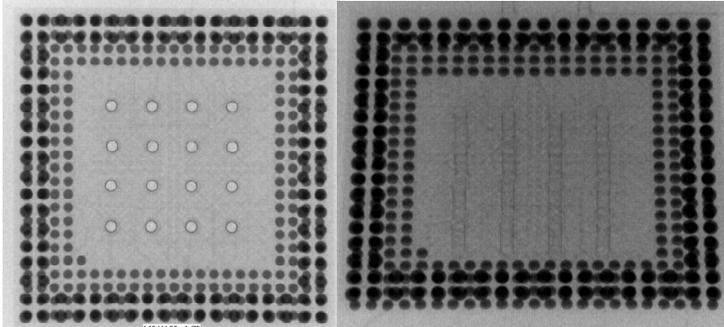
X-ray and daisy chain layout of 128 IO BGA package
